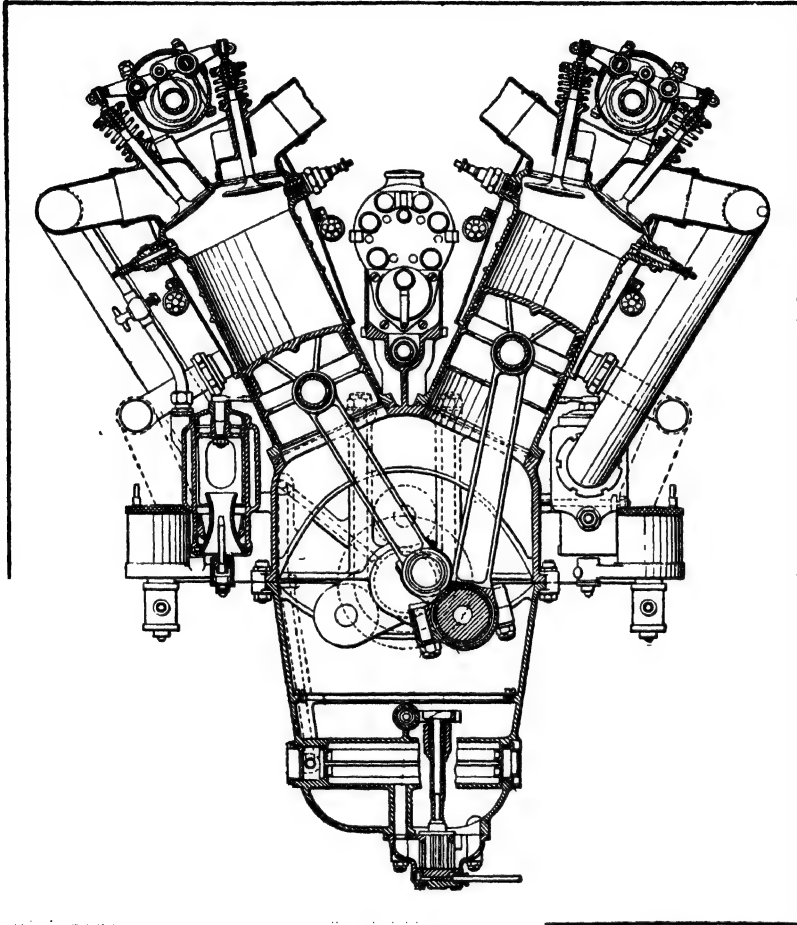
Double Connecting Rod Assembly Using Blade and Fork Rods for Installation on Single Crankpin, When Opposite Cylinders Have the Same Center Lines.
